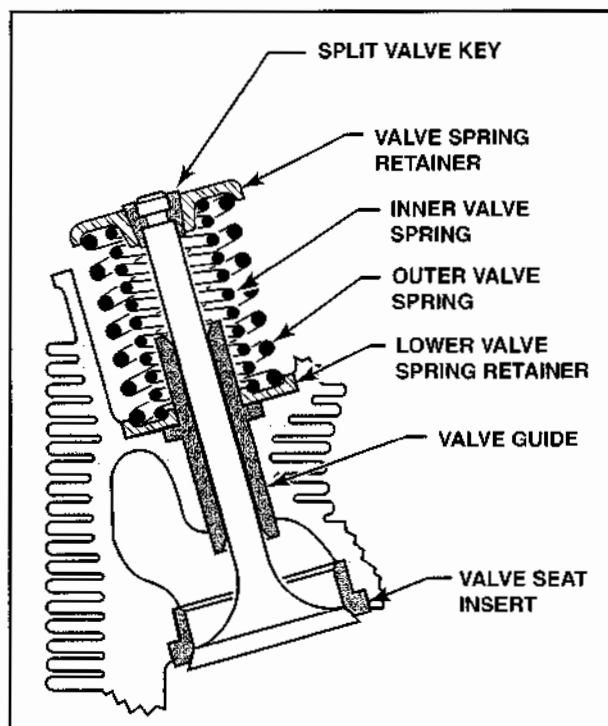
The valve seat insert provides a sealing surface for the valve face while the valve guide supports the valve and keeps it aligned with the seat. Valve springs close the valve and are held in place by a valve retainer and a split valve key.
